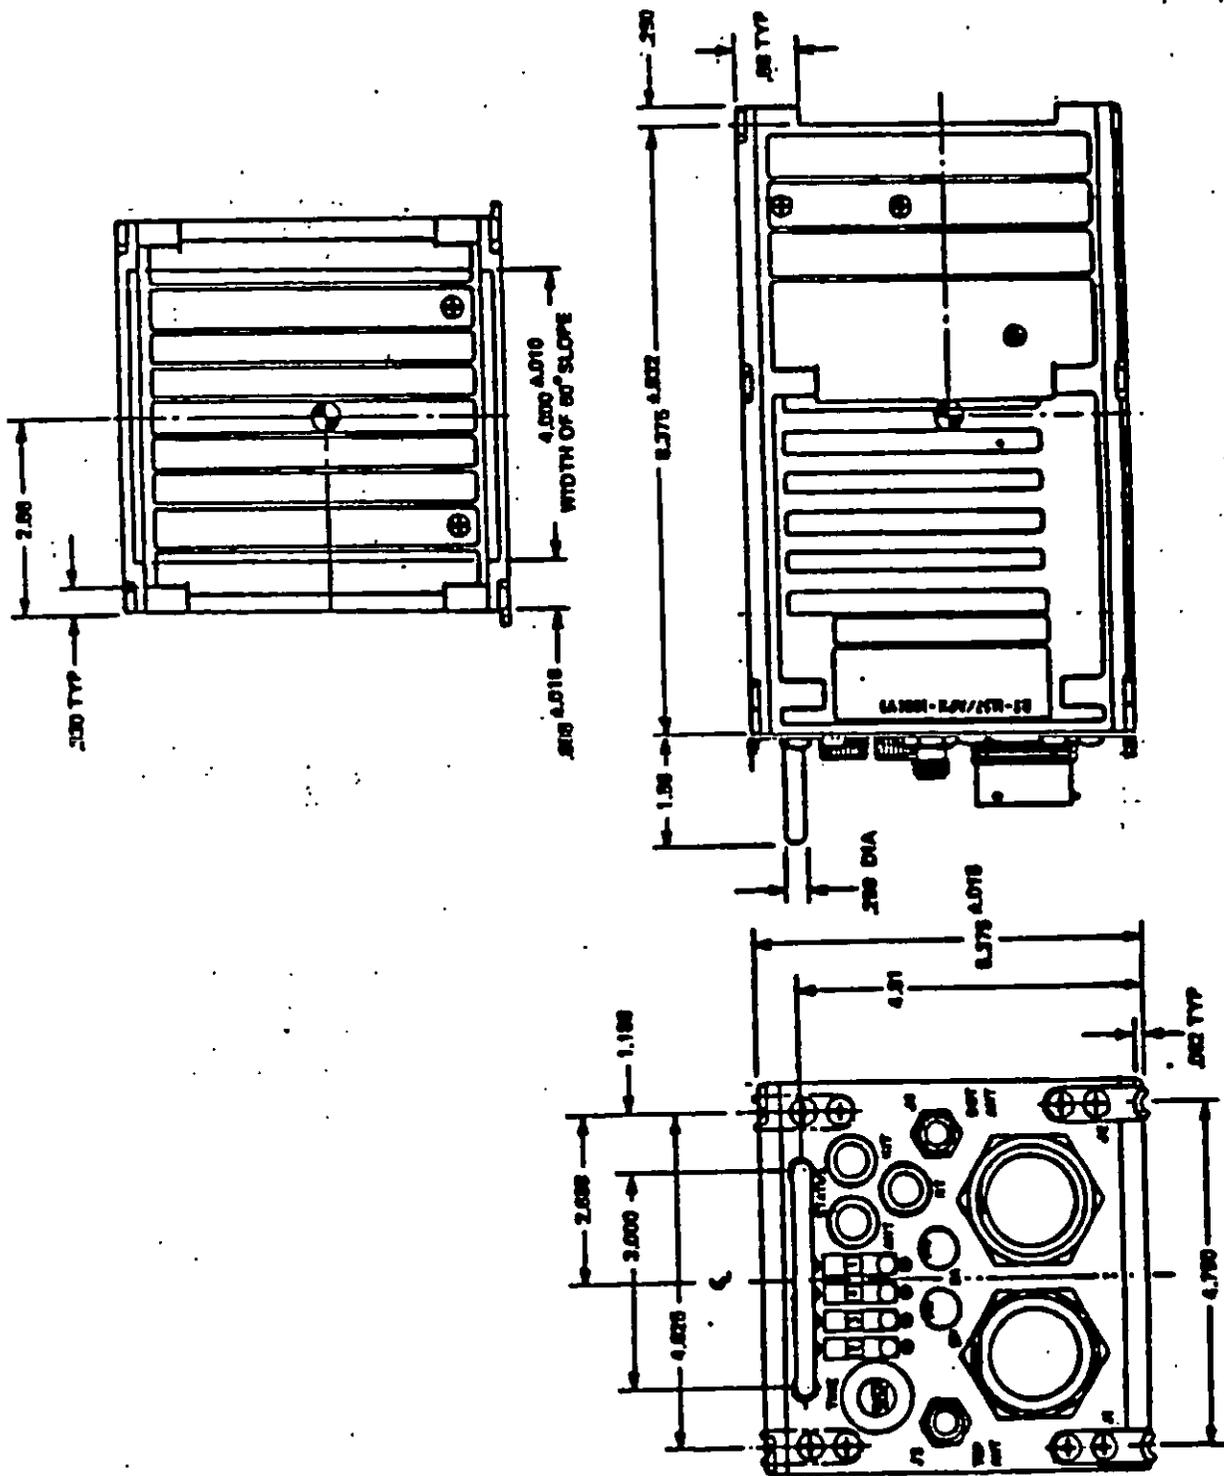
RT-1157/APX-100(V), outline dimensions
